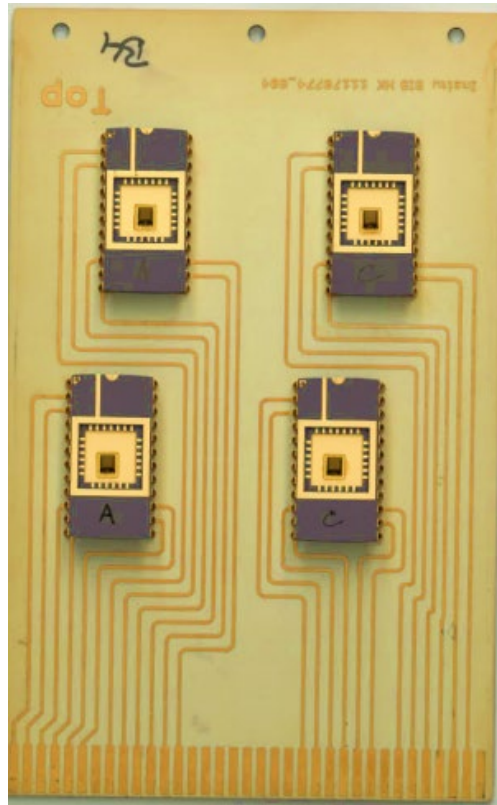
Sensors A and C were glued, wire-bonded to C-DIPs, and connected with Teflon-gold PCB through a mounting hole.
